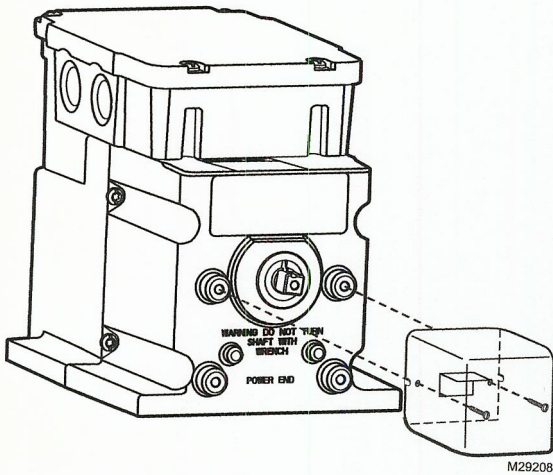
Mounting the Q181 on M9185 or M9186 style modutrol motor, or any motor with bosses.
